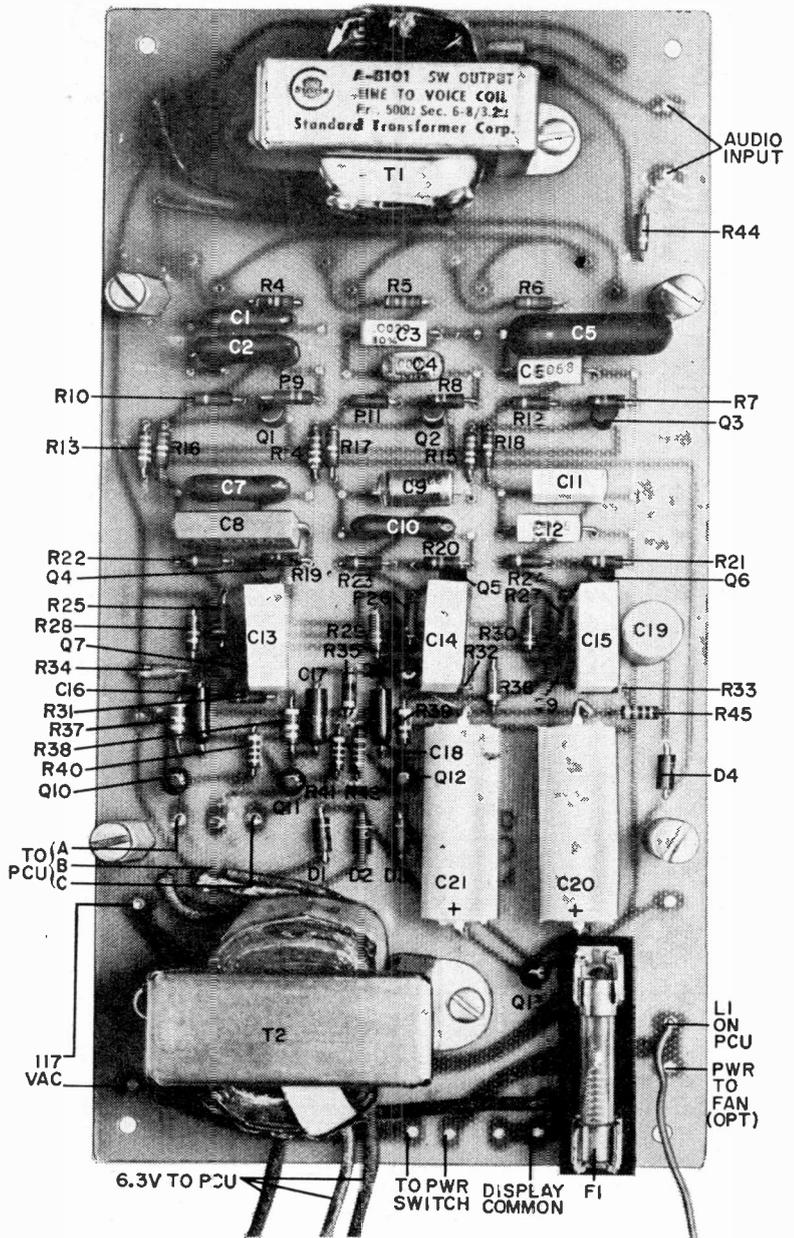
Component installation on QFU PC board. Also shown are connections made to the board.
